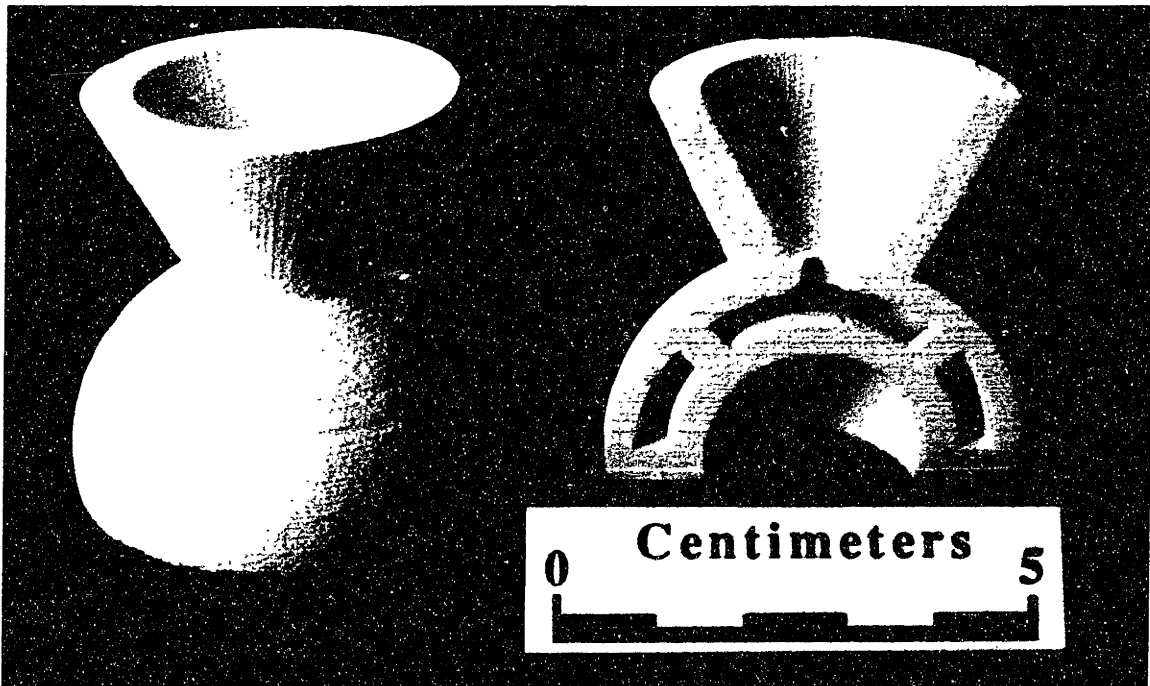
Photograph of a complete printed shell for metal casting and a printed cross section of the same part.
